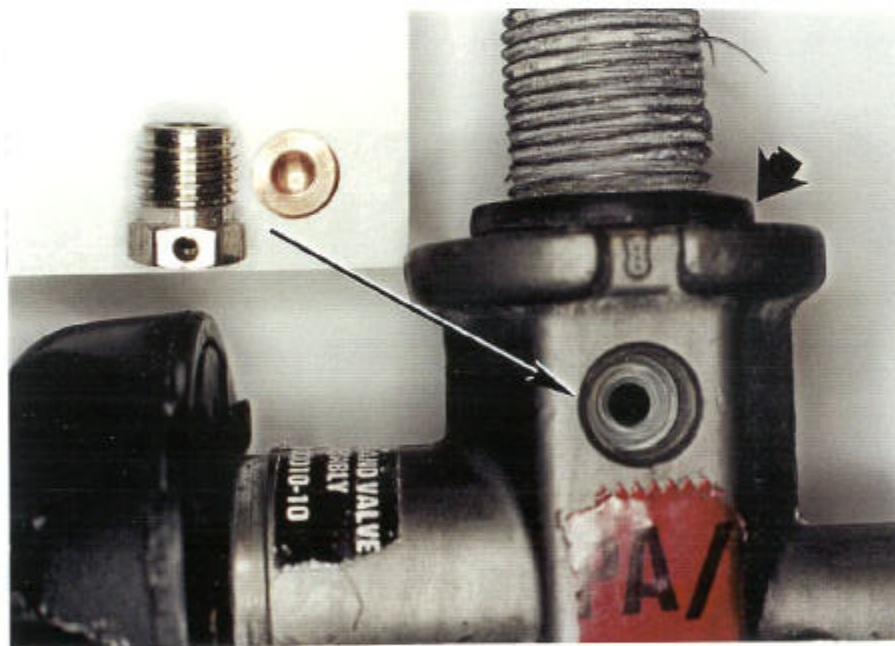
Valve from exploded cylinder showing "O" ring seal (arrow), deformed and several sheared threads, deformed copper rupture disk and retainer. Note white corrosion product on threads.
